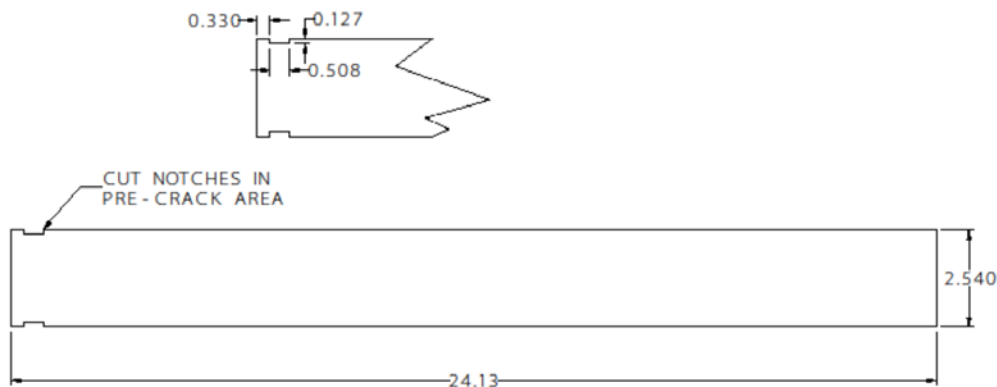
DCB Specimen geometry. Notches are for securing specimen to clevis grip. Measurements are in centimeters.
